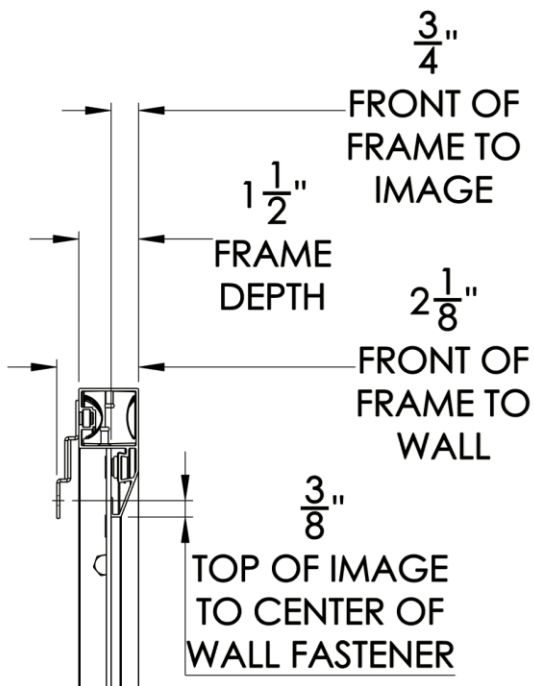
Side view drawing of WSDQ with EZ Mount G2 showing vital dimensions of bracket that goes to wall.
